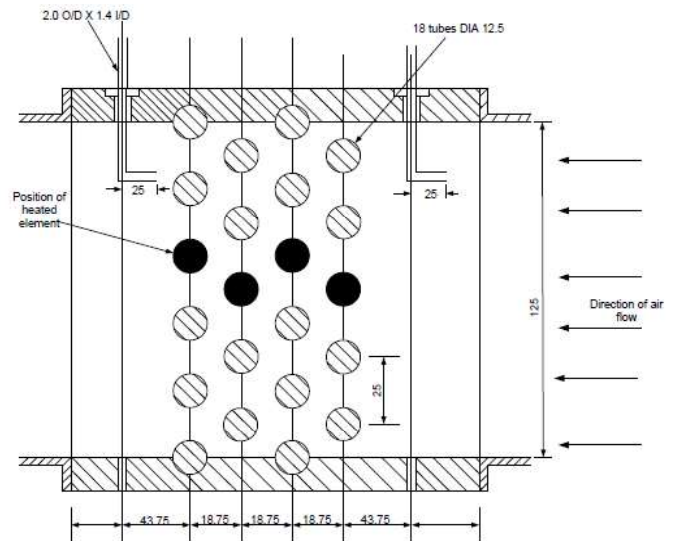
Nominal dimensions of the working section with staggered tube arrangement
